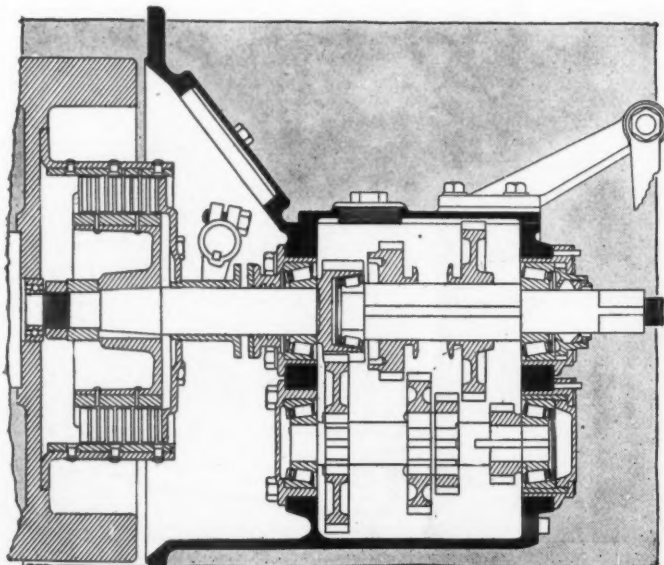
Brown-Lipe model 35 unit power plant gearset
